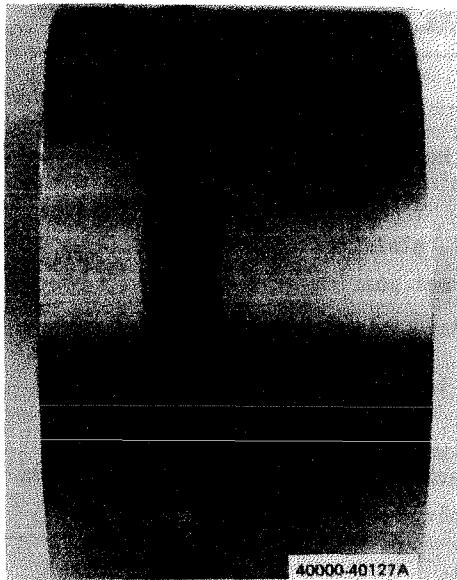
Stress corrosion cracks in unpeened Type 347 stainless steel pipe weld.
